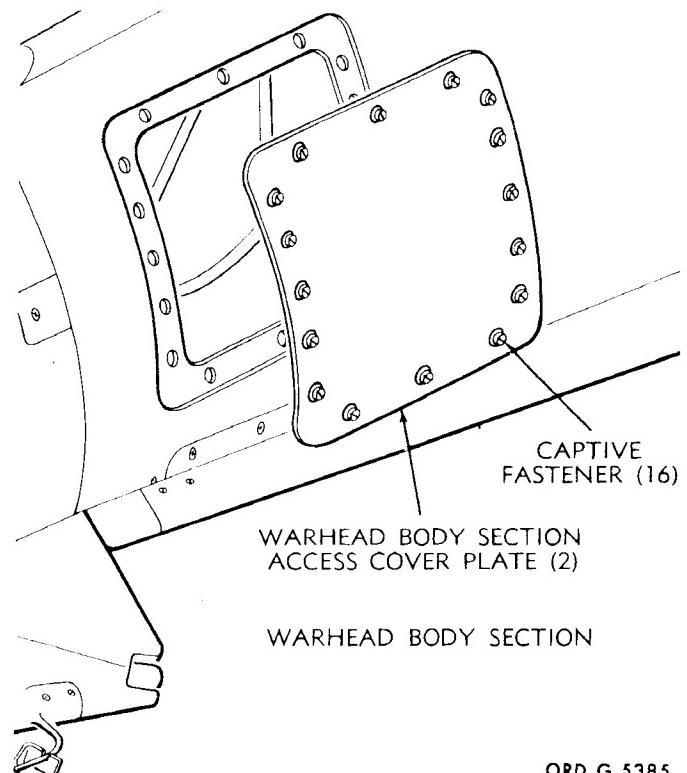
Removal and installation of the warhead body section access cover plates.
